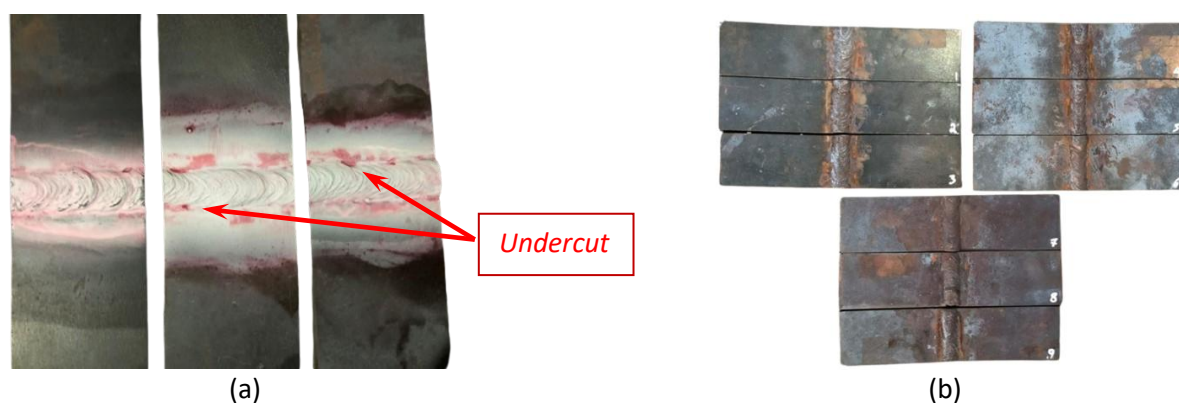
(a) Penetrant test results, (b) PWHT process results
